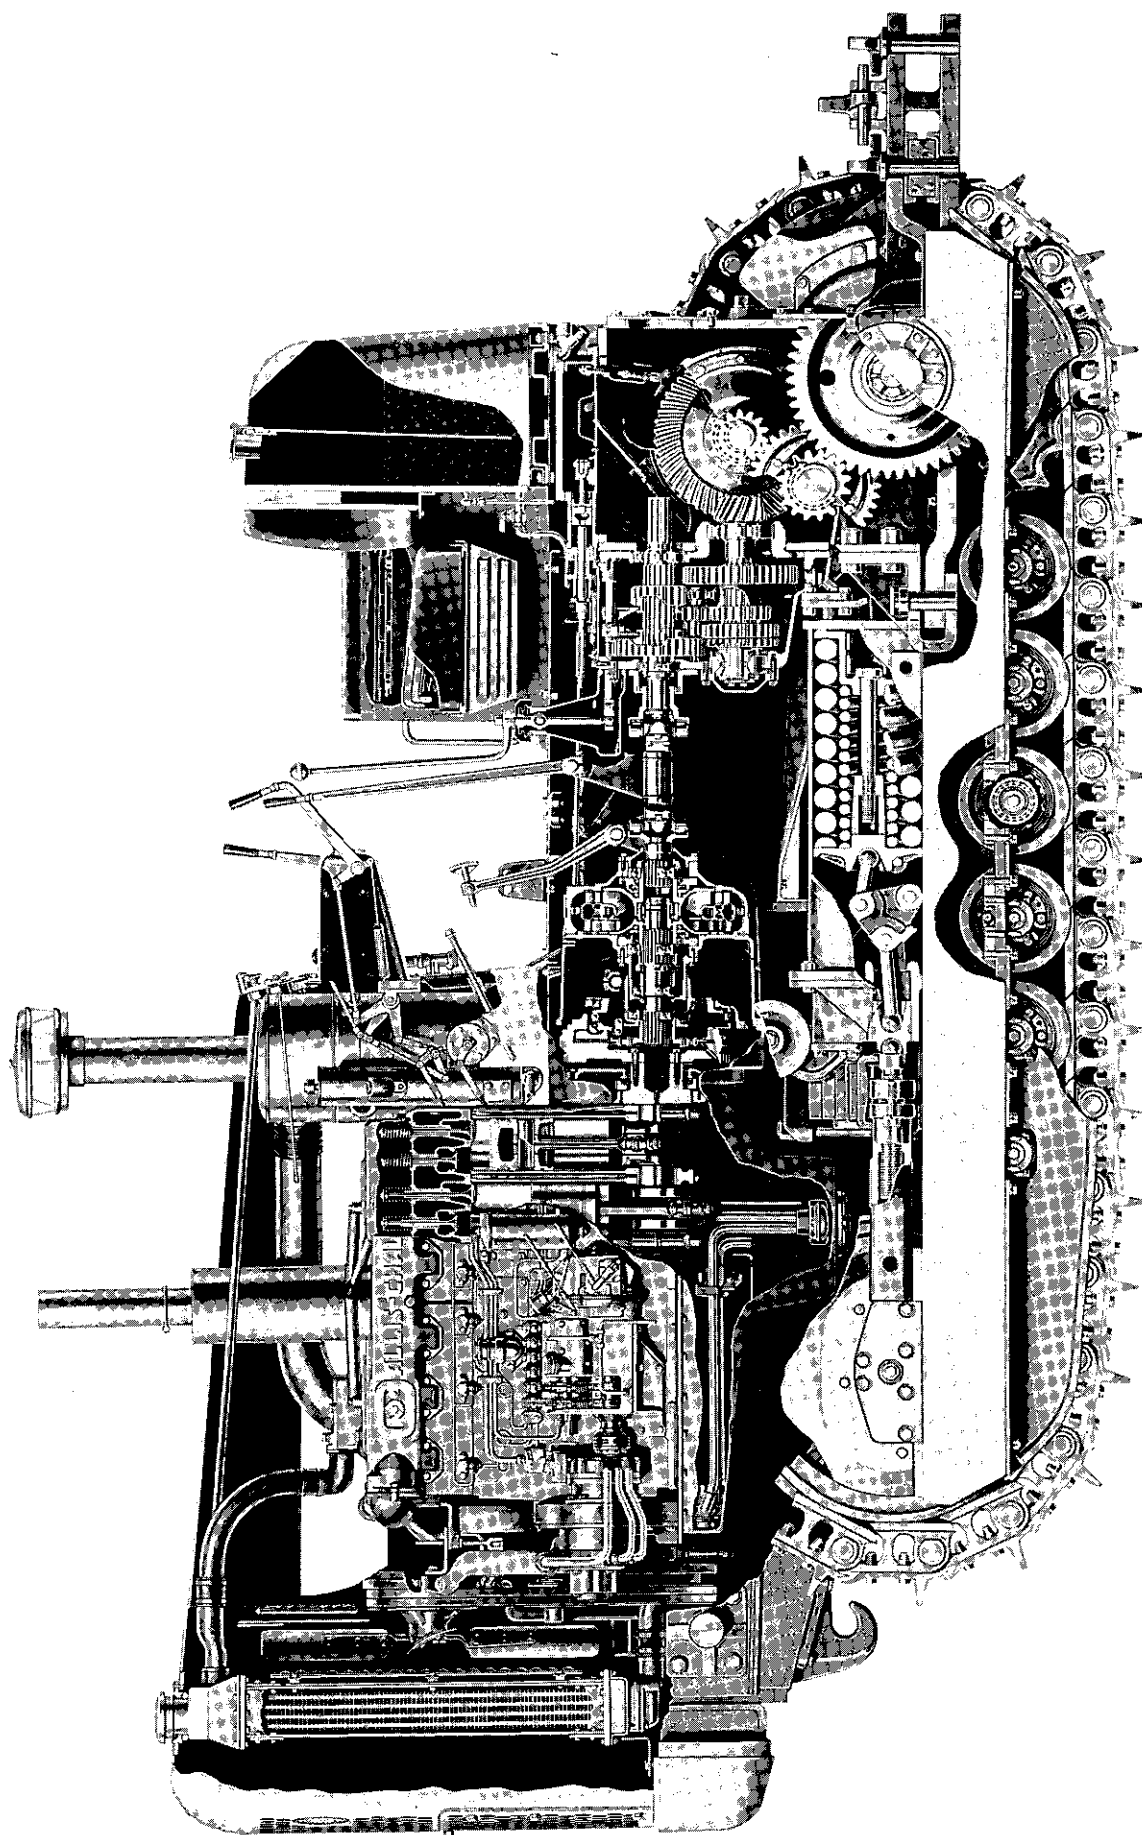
HD 21A Tractor with HDS 844 Engine —
